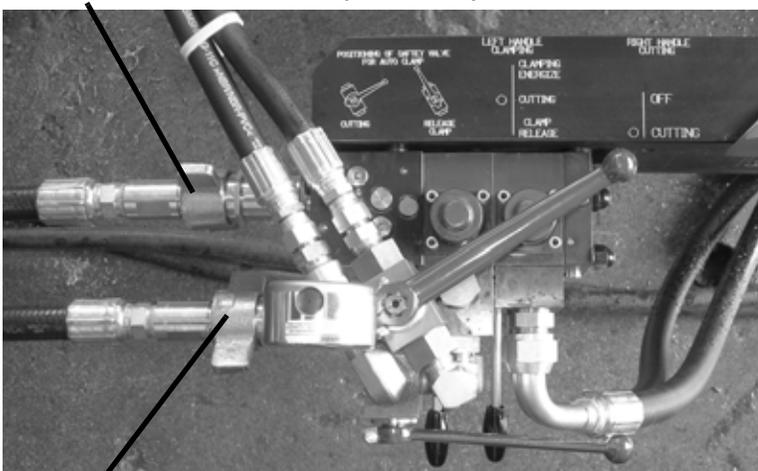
The machine-mounted control system allows you to operate the cutting and autoclamp drives at the machine.
